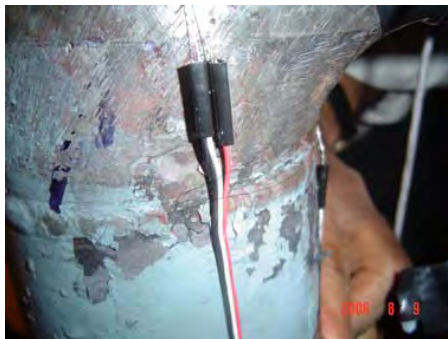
Photograph of crack at weld location of elbow-1
